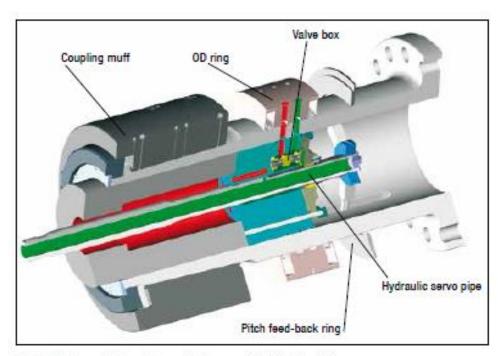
ODS type - OD box with coupling flange and pitch feed-back ring
